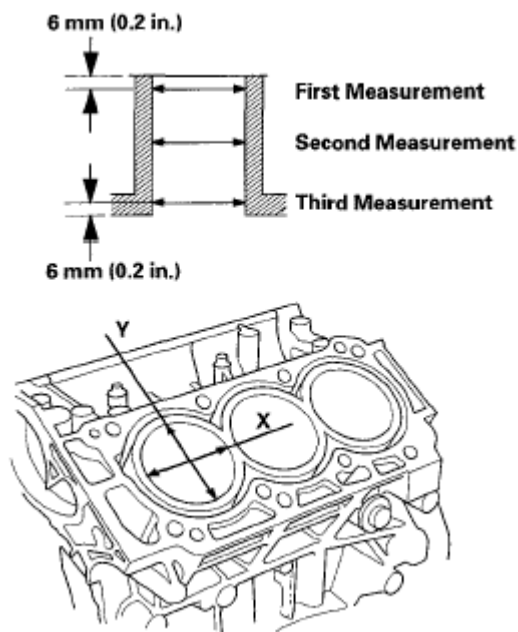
Identifying Cylinder Wear And Taper Measuring Direction
